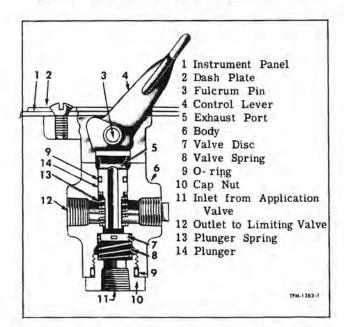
Two-Way Control Valve (Also I.C.C. Valve)
